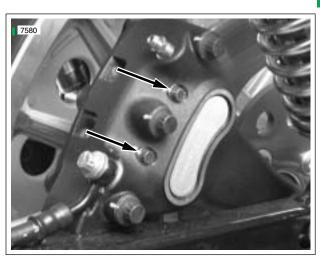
Pad Pins (12 pt/0.25 in.) (Rear Caliper Shown)
